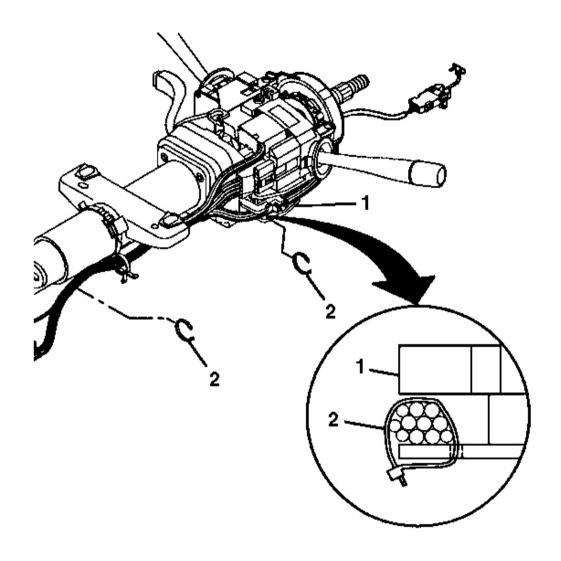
Wire Harness Straps & Steering Column Tilt Head Assembly Courtesy of GENERAL MOTORS CORP.
